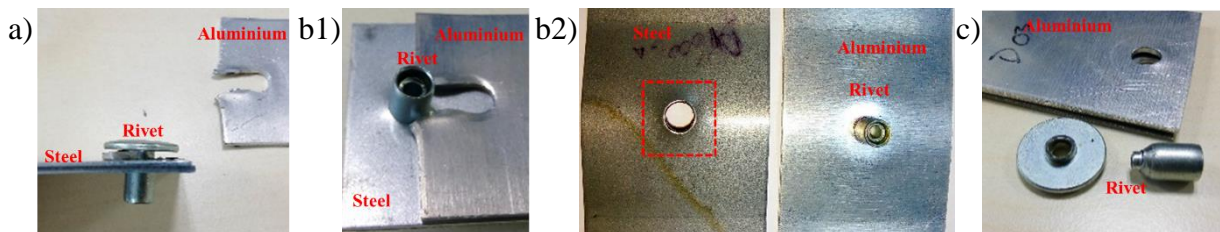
Observed failure modes: a) top sheet material failure; b1) bottom sheet material failure in tensile shear; b2) bottom sheet material failure in cross tension; c) rivet failure
